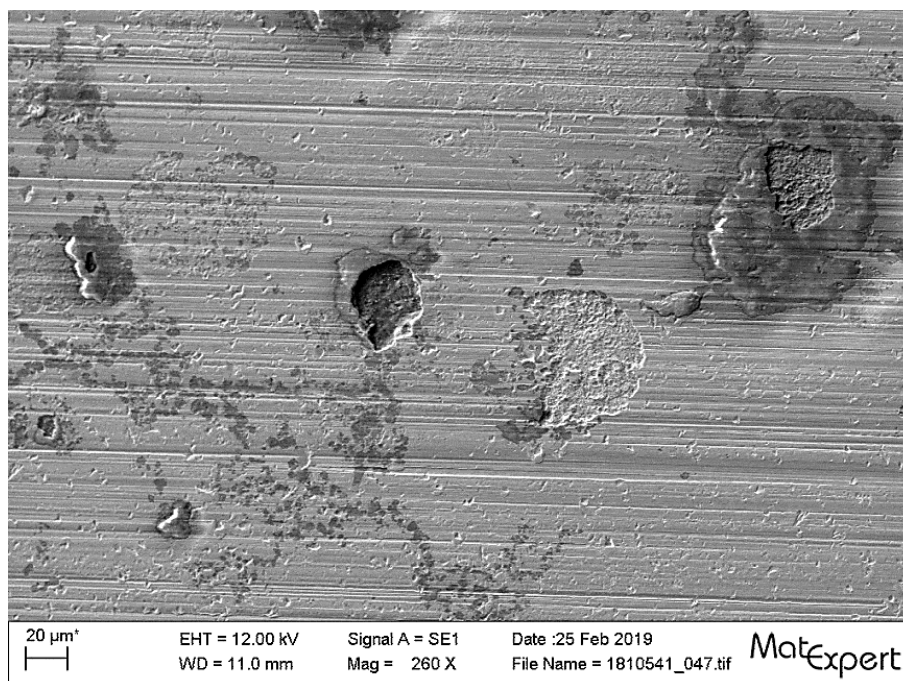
Ball bearing from the left engine, inner-race bearing track – material chipping, corrosion and minor pitting.
